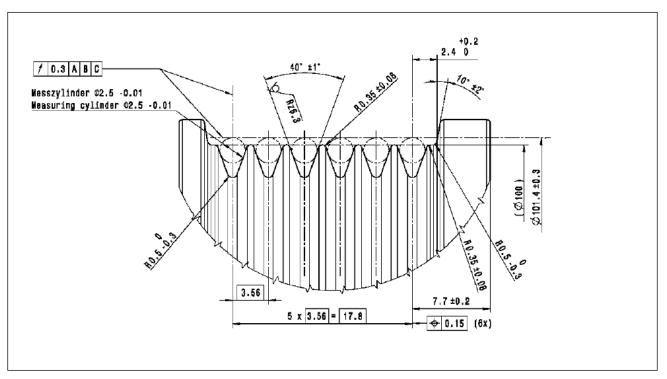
Detail U - Drive pulley for air conditioner compressor DENSO-7SEU17
